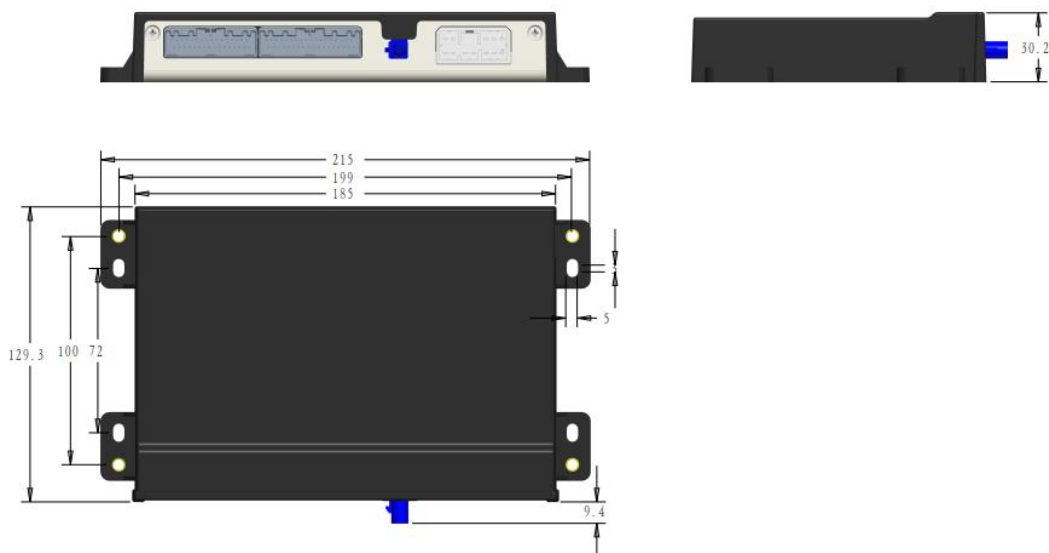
C700 /C700-D/C700-G outline and installation dimensions
